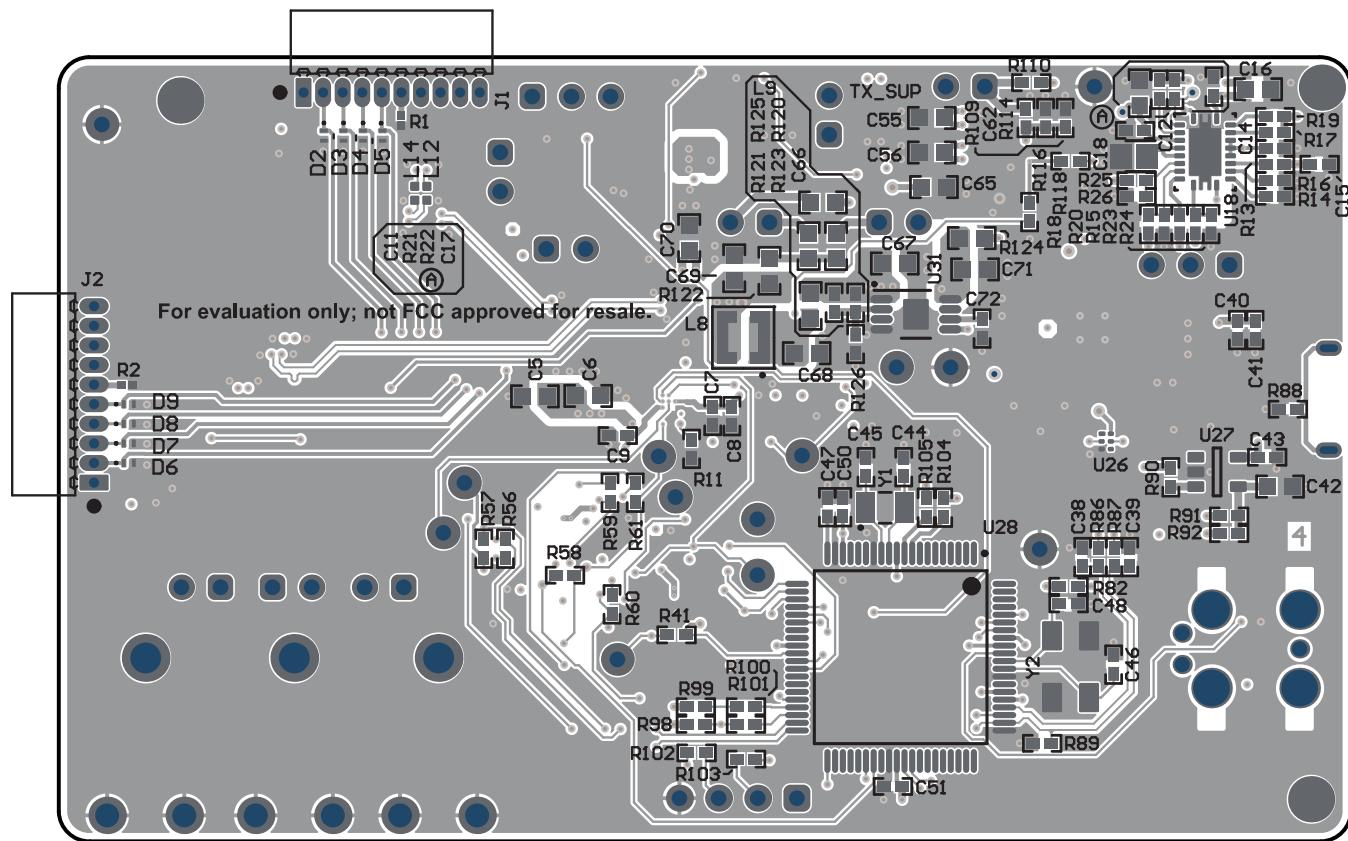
AFE4950EVM PCB Layout - Bottom Layer with Components (2 of 6)
